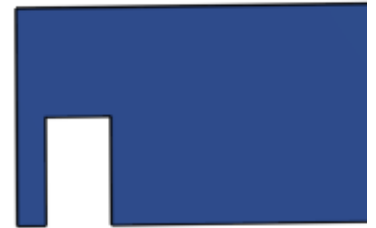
This figure depicts one end of the designed blade. The rectangular cut out can clearly be seen. Its function is to prevent the blade from slipping through the pole. The material of the blade is stainless steel. Both ends of the blade are fabricated the same. This figure was created using Onshape (Onshape Inc., Massachusetts, USA)
